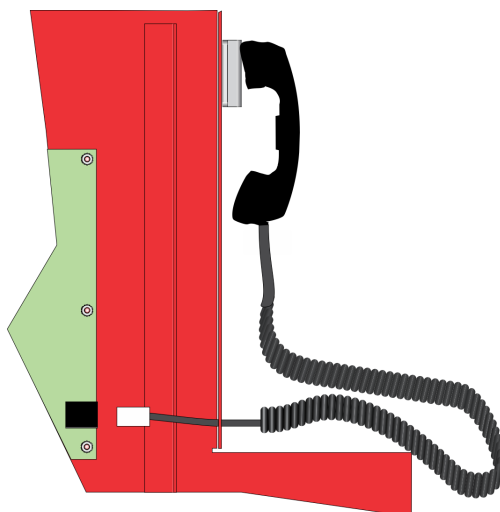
Handset Cord Inserted Through Dead Front Panel Hole
